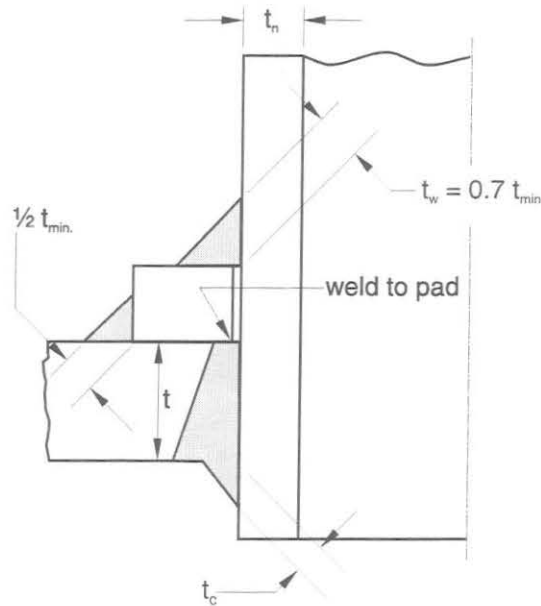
Acceptable Types of Welded Nozzles and other Connections to Shells, Heads, etc. [Fig. UW-16.1(h) in ASME VIII-1]
